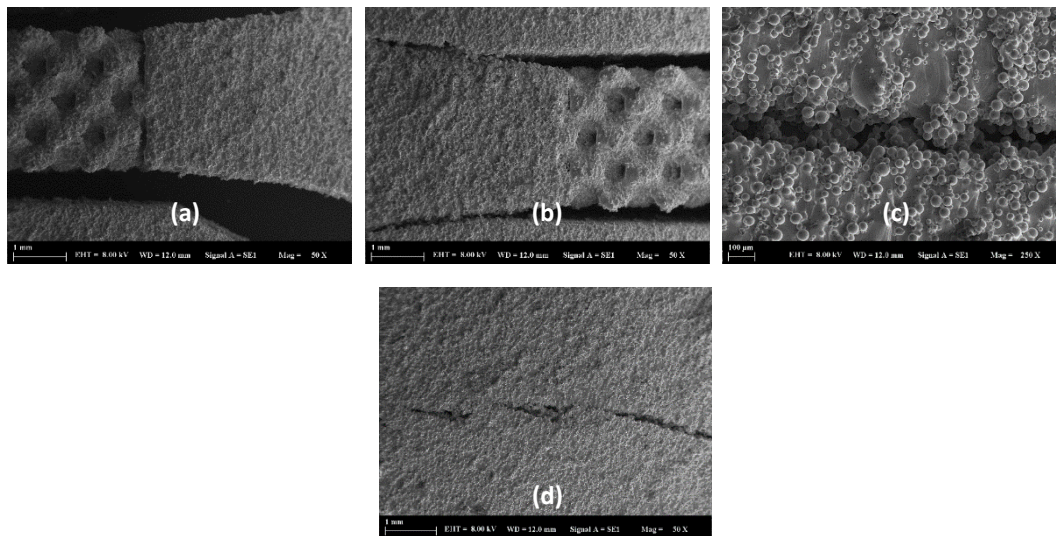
Manufactured tensile test specimens with contact support structure design.
